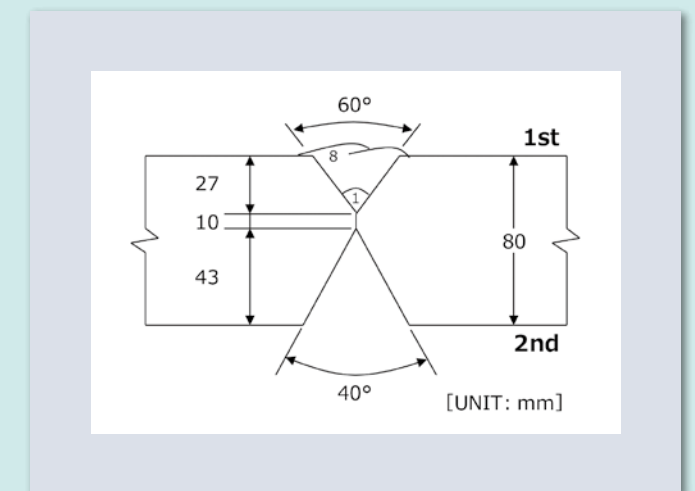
Groove configuration and pass sequences for the 1st side welding
